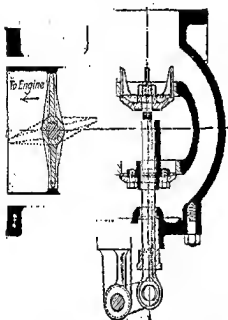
Double-beat poppet throttle valve and butterfly valve.
